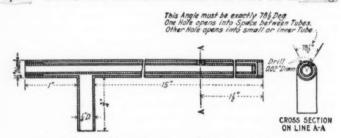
Brass Static-Pressure Measuring Instrument (Large tube ½ in. outside diameter. Must be smooth and true on the outside Small tube 0.125 in. outside diameter, 0.063 in. inside diameter. All joints must be airtight.)
